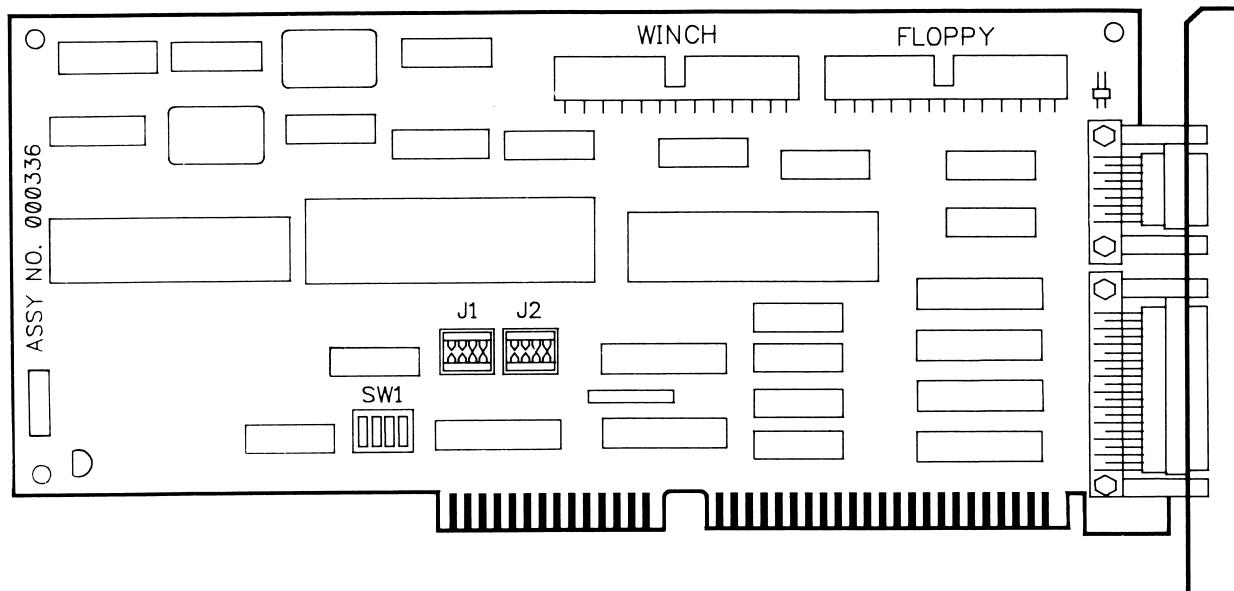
Multipurpose Fixed Disk Drive Controller Board (assy. no. 000336-001/021).
